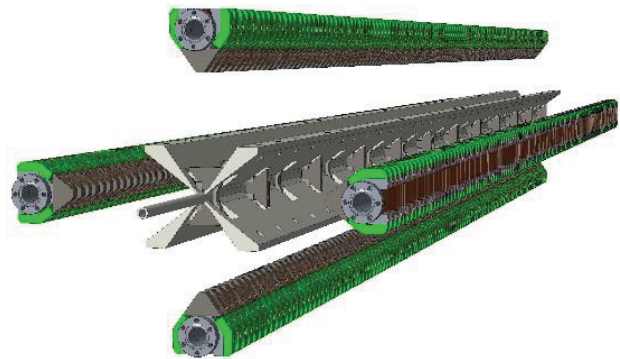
Exploded view of the SCAPE magnet/vacuum chamber concept.
